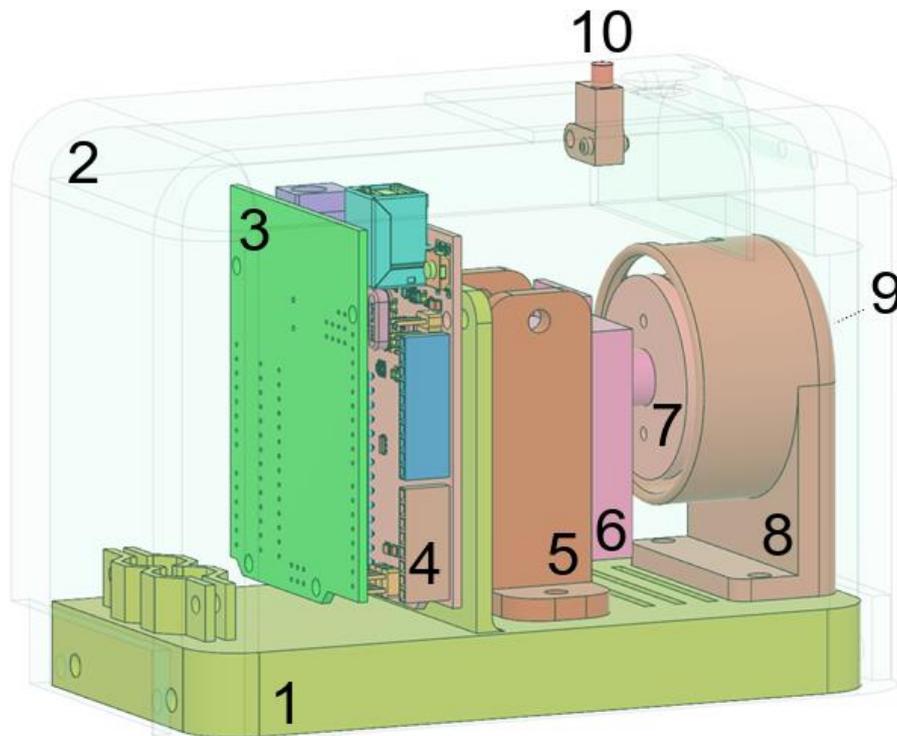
Assembly of actuator box. 1) box base, 2) box lid (transparent), 3) protoshield (wires and electrical components not shown), 4) Arduino Uno, 5) servo holder, 6) servo, 7) spool, 8) spool holder, 9) bearing (not visible inside spool holder), 10) end-stop switch
